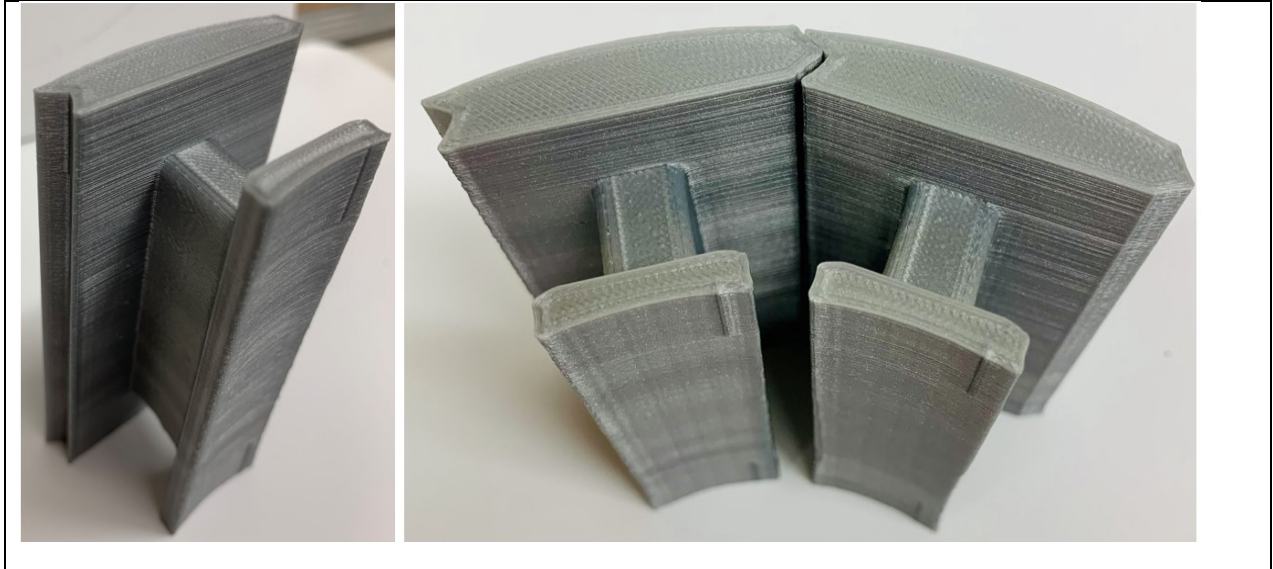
Tooth-3 (3D Printed) SMC tooth using plastic.
